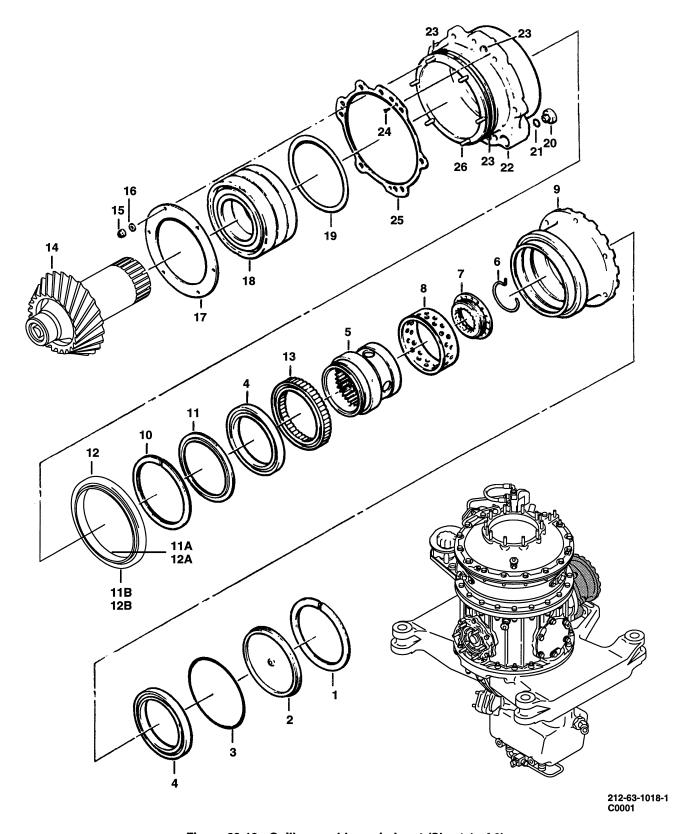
Quill assembly, main input (Sheet 1 of 2)
